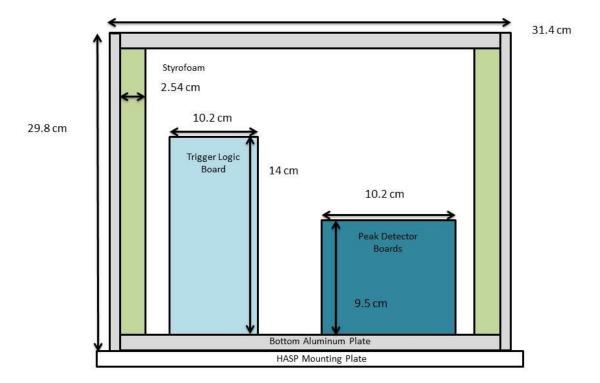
Payload as viewed from the front. The bottom and side aluminum plates, as well as the styrofoam, are clearly visible. The electronics are connected using screws that go into the bottom aluminum plate.
